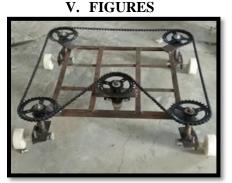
Model of Bluetooth 360° Rotating Mechanism
